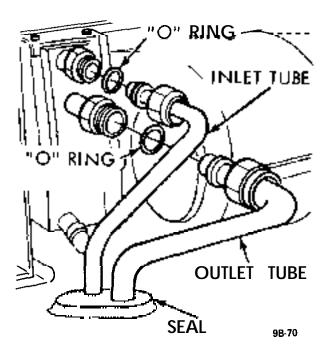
B-94 Inlet and Outlet Pipes and O-Rings GT
